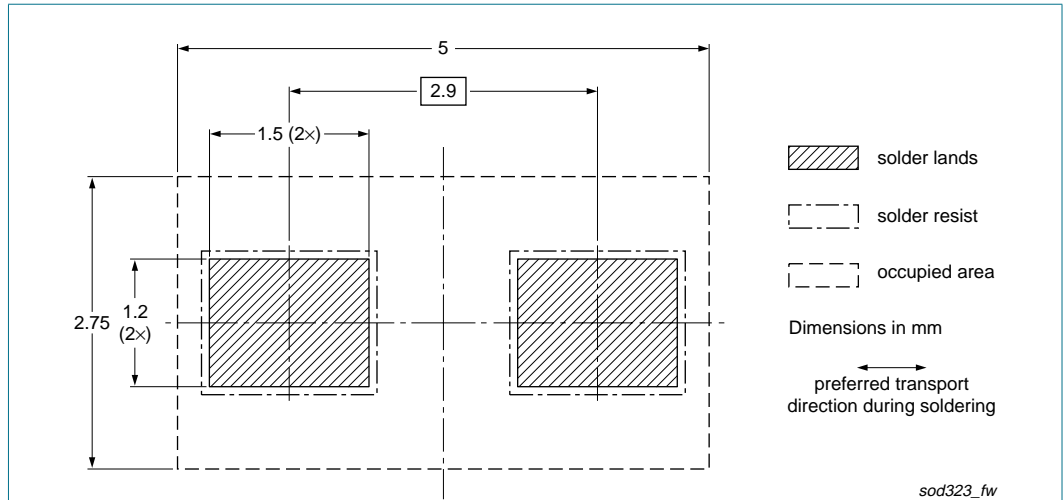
Wave soldering footprint BAS316 (SOD323/SC-76)
